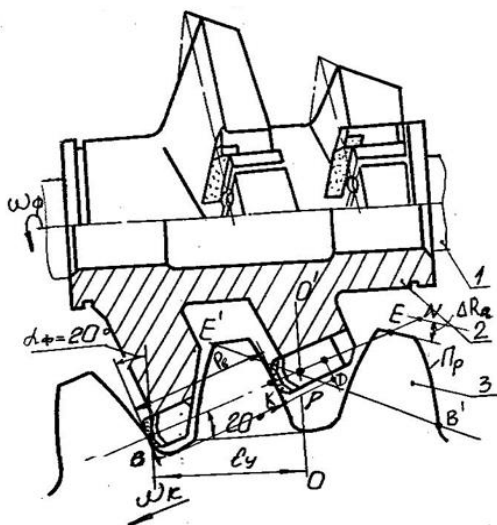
Scheme of machine engagement of a special carbide cutter with a machined wheel
